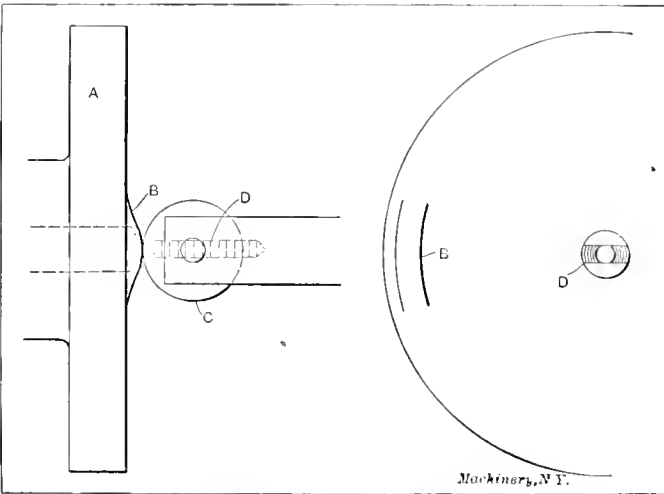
Diagrammatical View of Special Lathe Attachment used for Backing Off the Reamer Teeth
